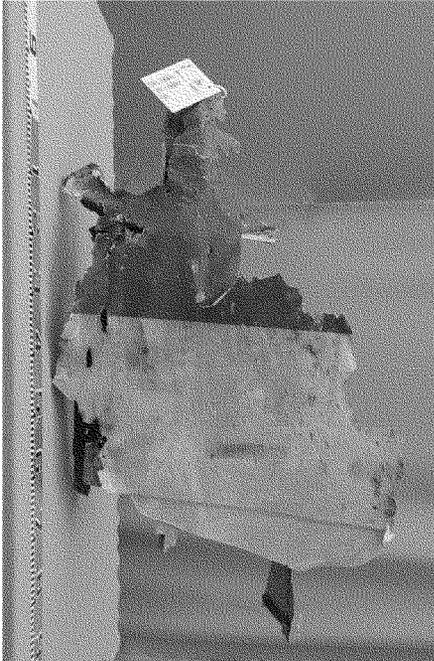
Part of fuselage left hand side showing holes and pitting. (Source: Dutch Safety Board)
